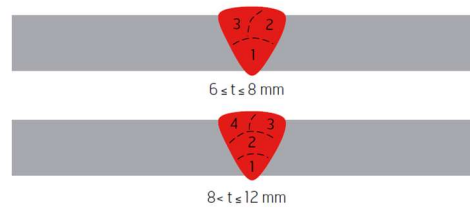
Recommended number of passes for welding thick sections of (U)HSSs using a single V joint preparation to fulfill the required impact toughness of welded joints (SSAB 2015b, p.14).
